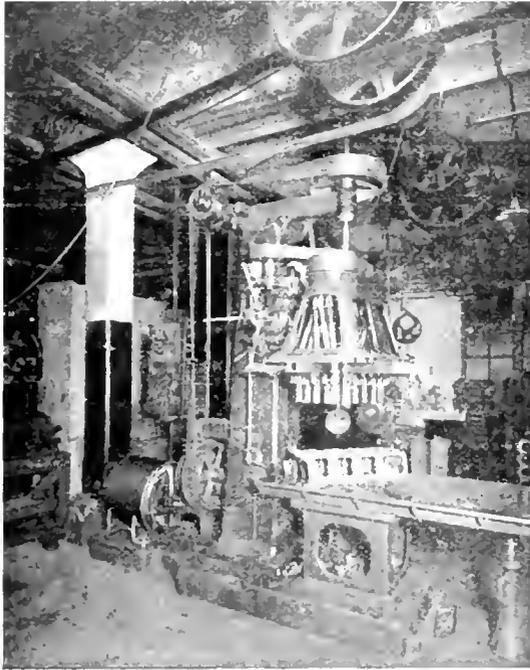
Drilling Motor Castings, Cadillac Machine Shops
